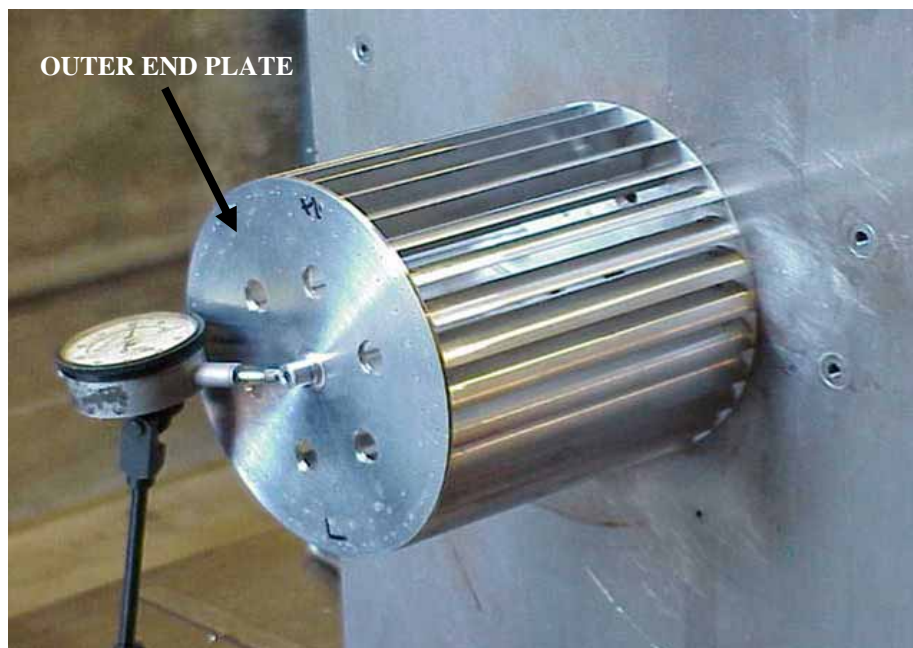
Assembled crossflow fan rotor installed on the drive shaft
